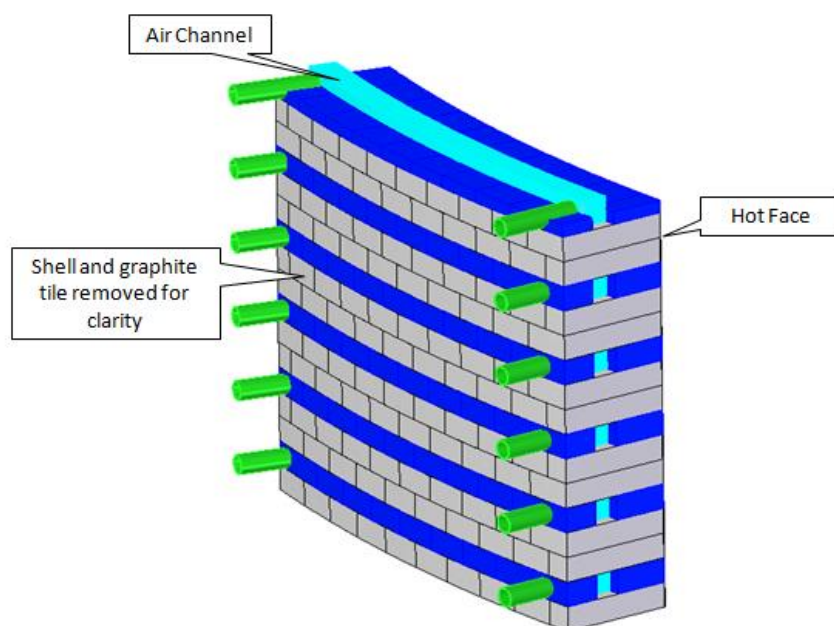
Horizontal Internal Air Cooling channels in a circular furnace wall
